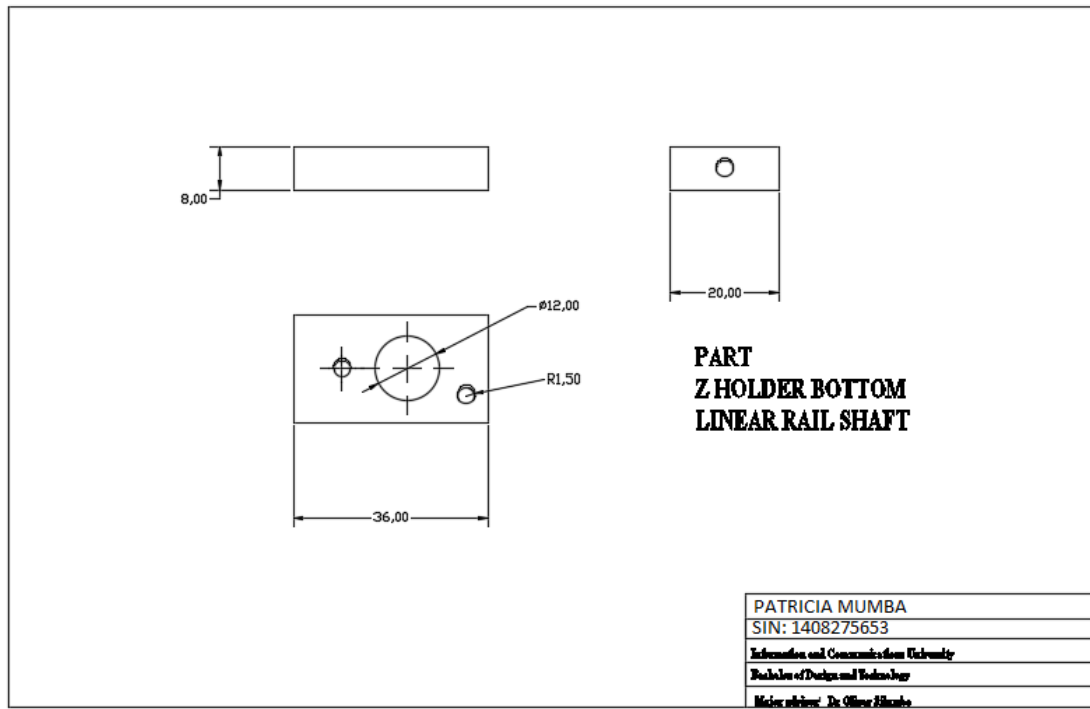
Z-HOLDER BOTTOM LINEAR RAIL SHAFT
